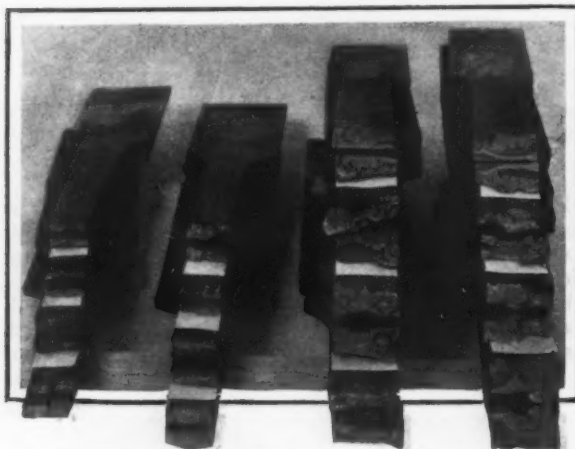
Welded Tensile Specimens After Rupture, Nickel-Chromium Steel Sheet
